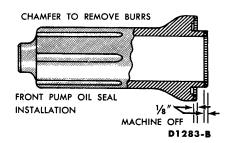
Dimensions for Reworking Front Pump Seal Installing Tool
